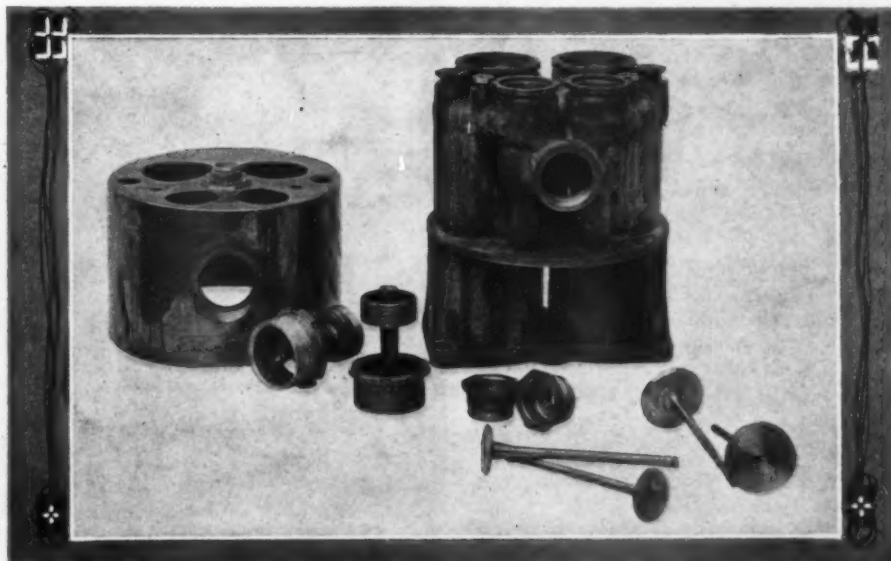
Showing the cylinder castings with water jacket taken off and valves removed
